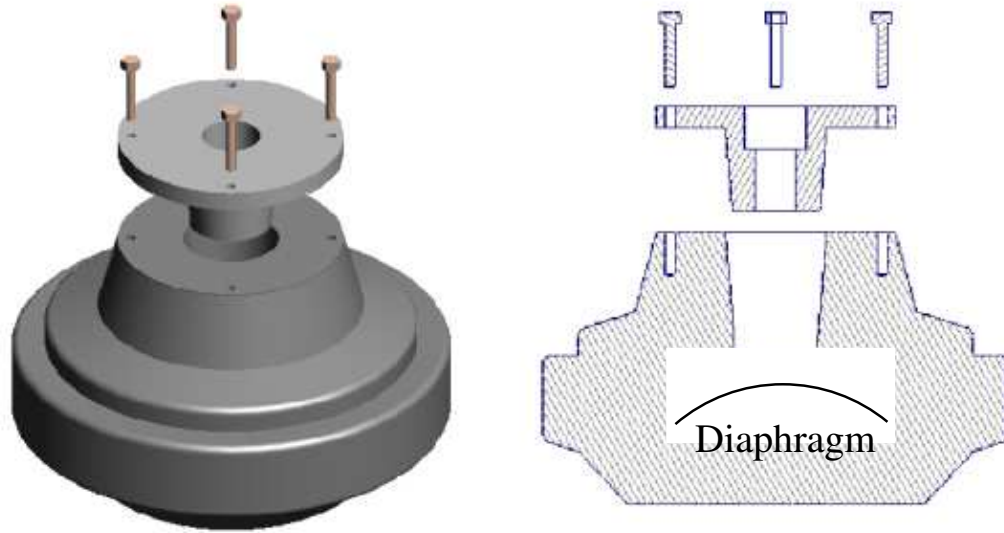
JBL 2446H loudspeaker and cylindrical tube adaptor
